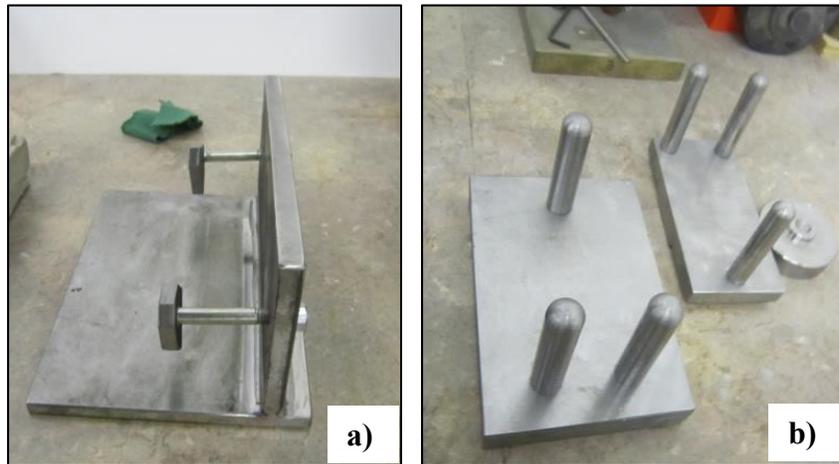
a) Shear Bond Test - “Fixture” b) Tensile Bond Test - “Loading Jig”.
